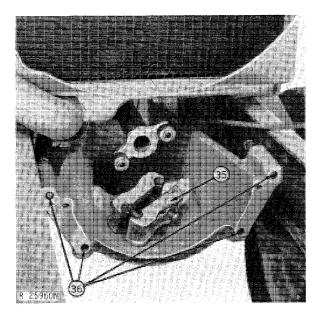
Hydraulic Pump Drive Coupling (Engine removed for illustration purposes)
